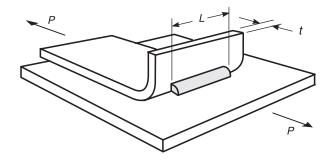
A—Single-Flare-Bevel-Groove Weld [see 2.2.3(1)]
